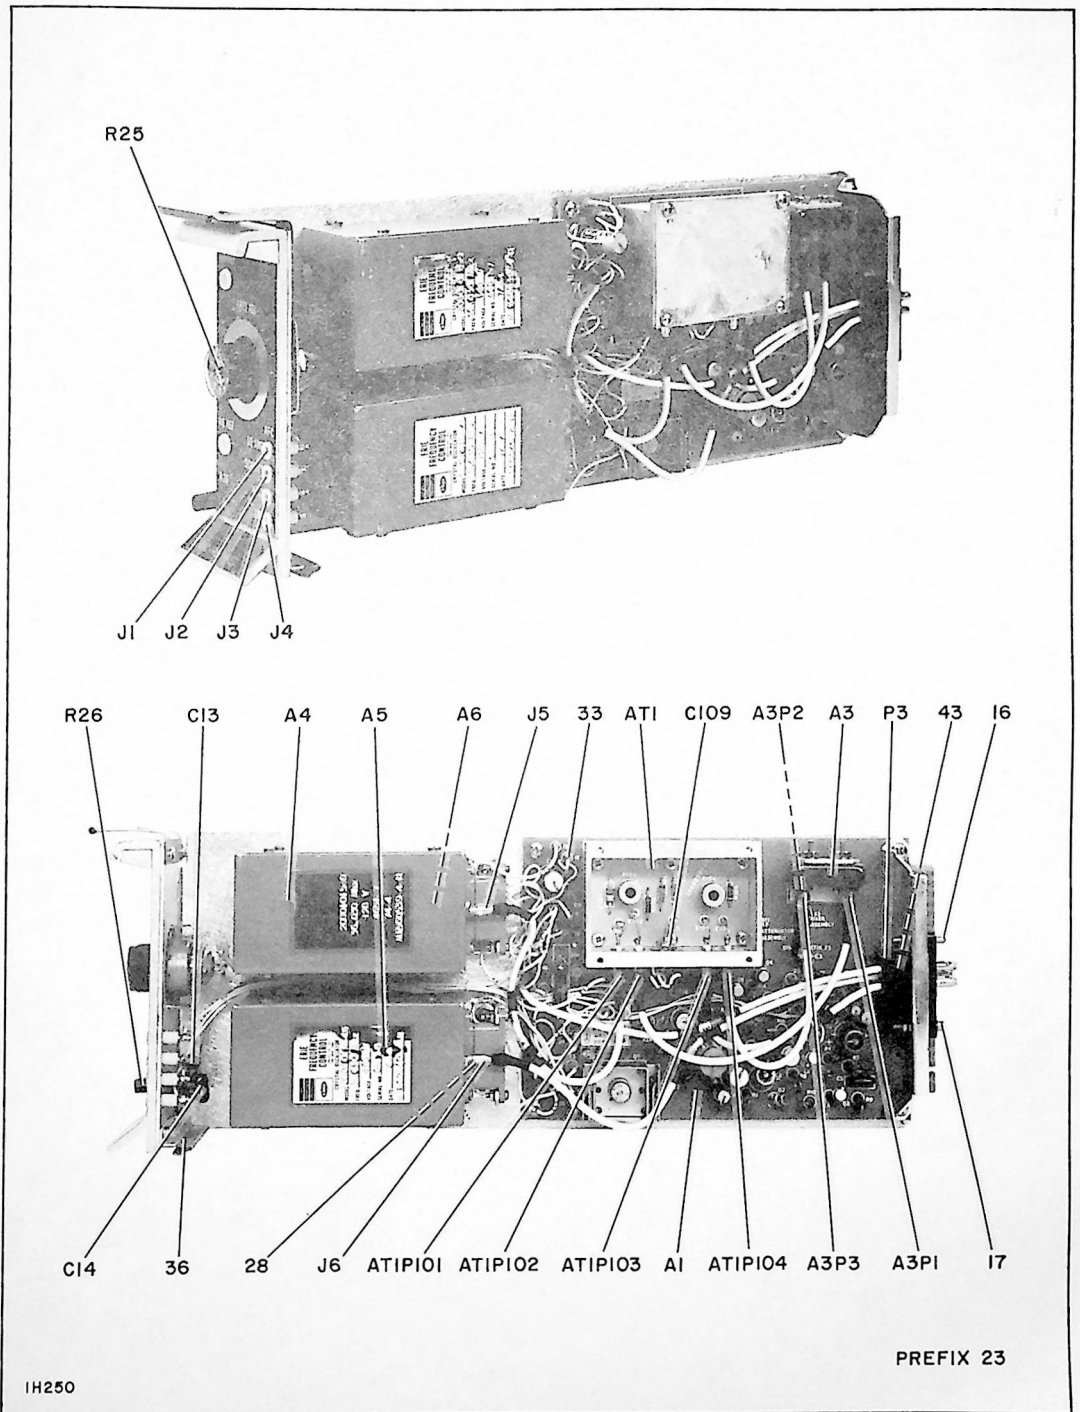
AFC/Reference Oscillator Module MI-560533 – Prefix 23
